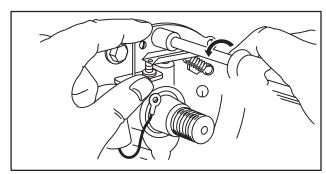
REMOVING STYLE II BREAKER POINTS
